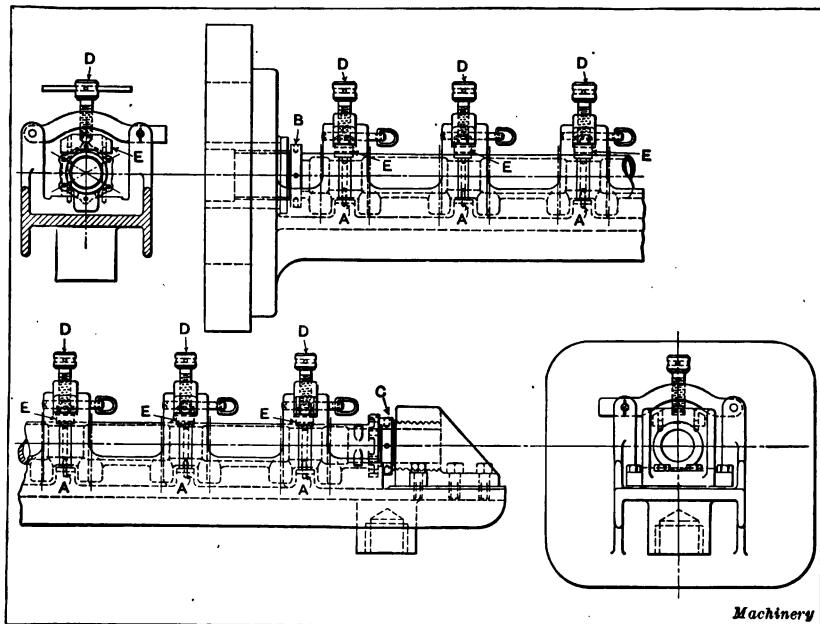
Work-holding Fixture used on the Broaching Machine for finishing Bearings of the Cam Frame shown in Fig. 17
